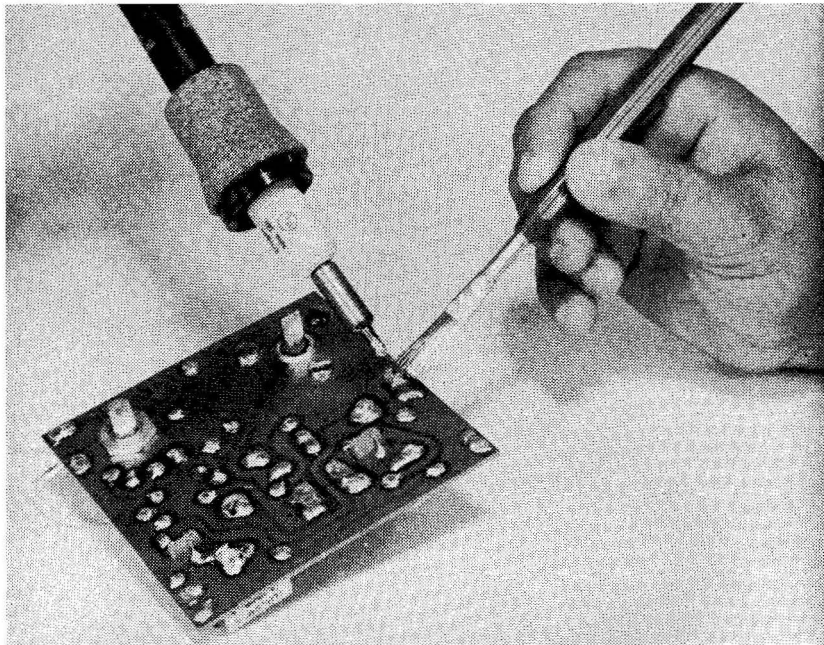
A wire brush may be used to brush away excess solder prior to de-soldering a component lead.
